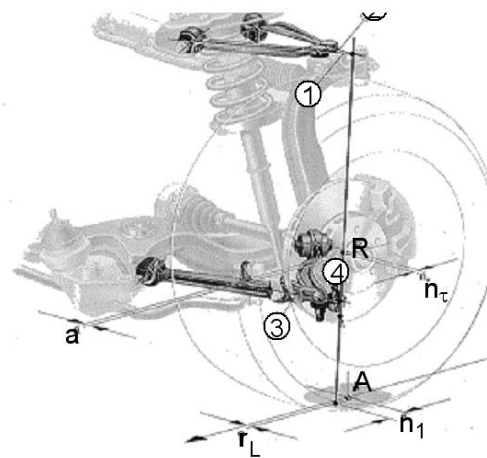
Position of the steering axle of four-link wheel suspension and McPherson front axle
